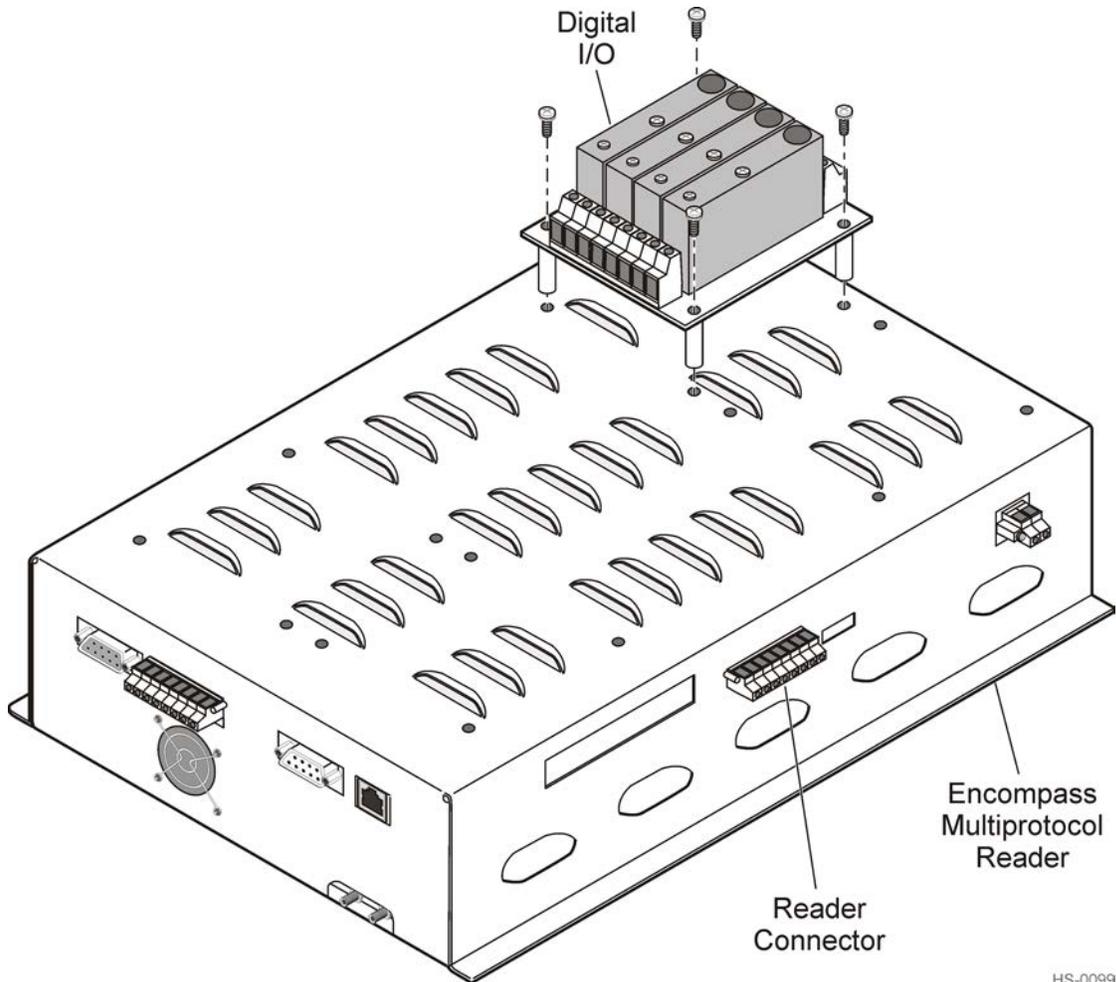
Location of Digital I/O Assembly on Encompass Reader
